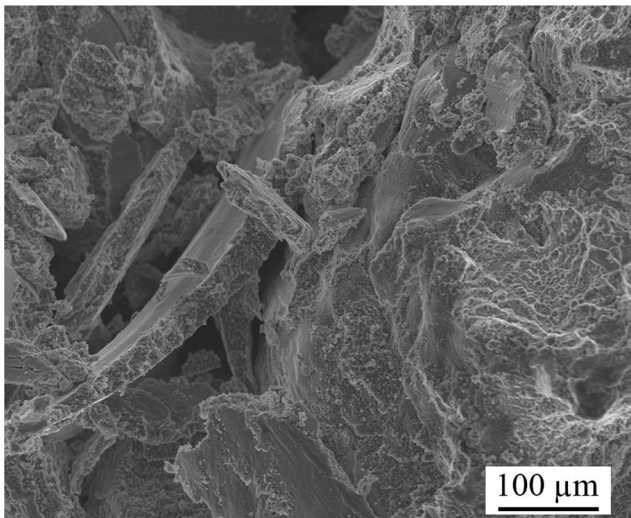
Exemplary SEM microphotograph of fracture surface of defective weld specimen
